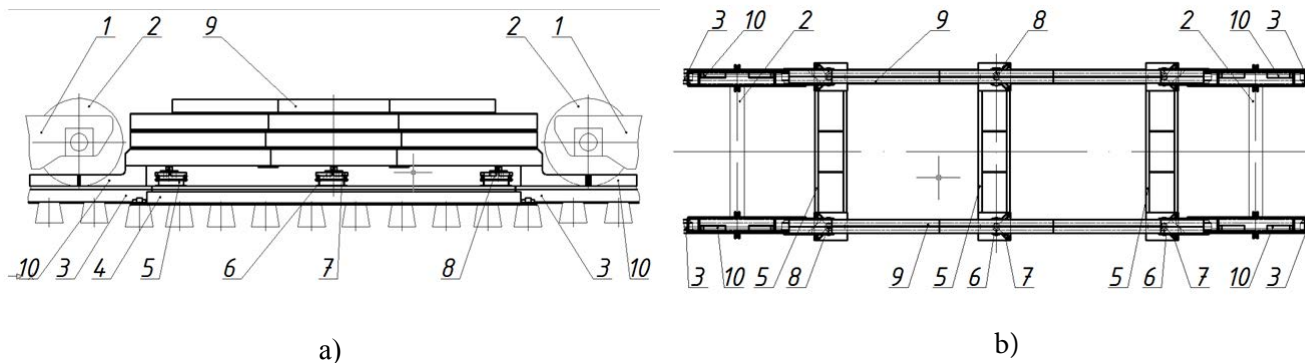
Version 2 of VNKU-60: side view (a); top view (b), where: 1 - railroad cars; 2 - wheelsets of cars; 3 - railroad rails; 4 - load carrier; 5 - weight-transmitting devices; 6 - weight measuring devices; 7 - strain-gage sensors; 8 - loading devices (hydraulic jacks); 9 - load-receiving devices; 10 - clamps for wheels
